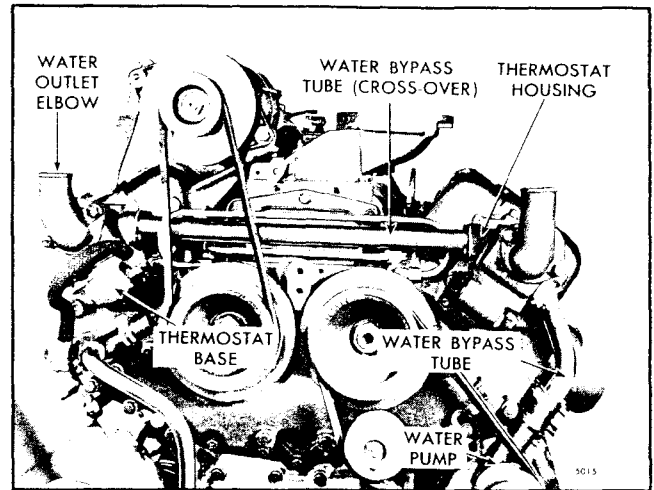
Thermostat Housings Mounted on a 6V Engine
